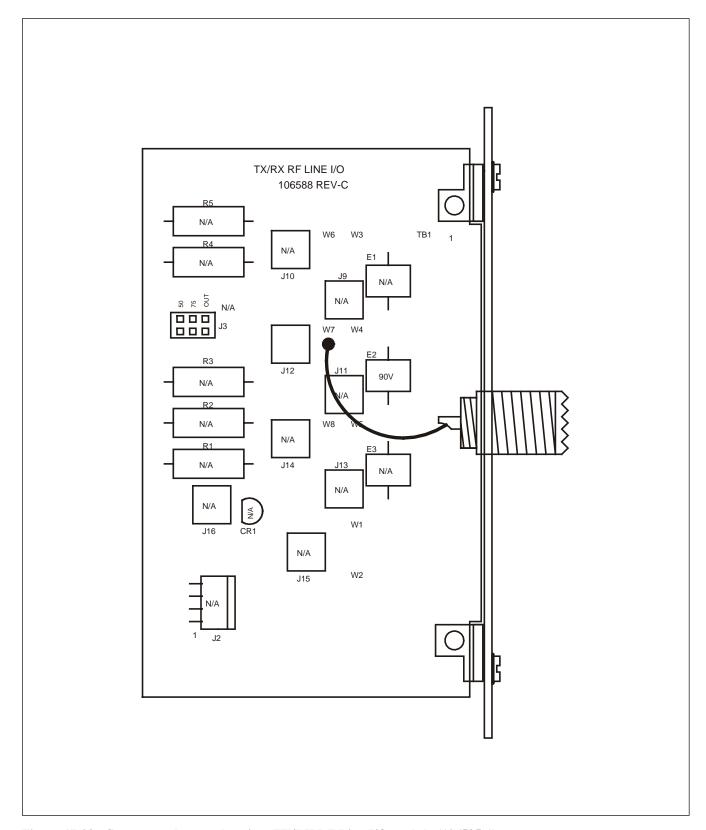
Component locator drawing, TX/RX RF Line I/O module (106585-1)
